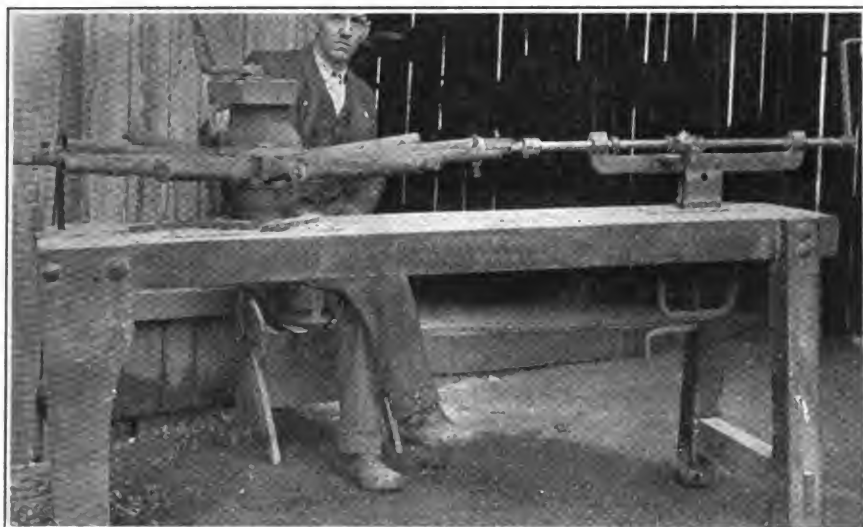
SHOWING THE MACHINE MADE BY MR. RICHARDSON
